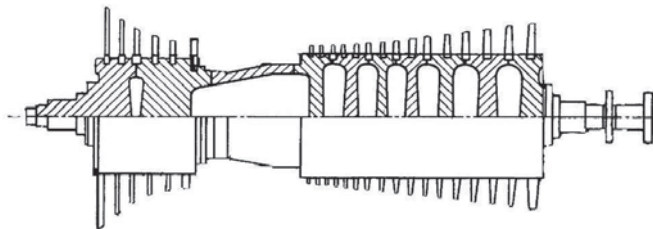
Typical rotor design of Alstom (Brown-Boveri) engines
